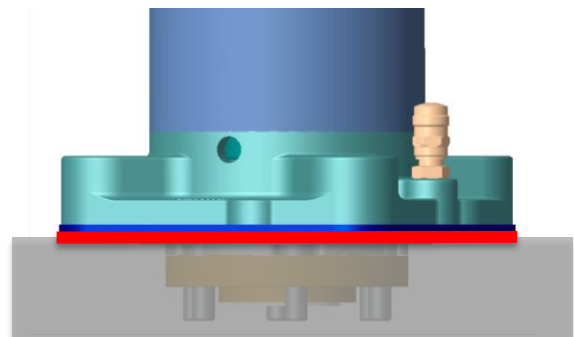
Bubble Leak Test at base of valve (red) to check primary PRV mounting gasket.
